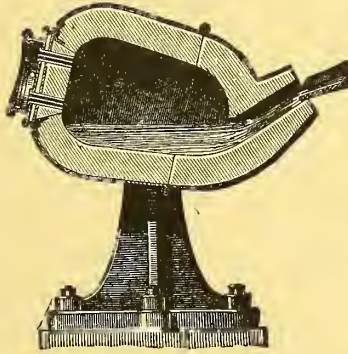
BESSEMER CONVERTER BEING FILLED.
